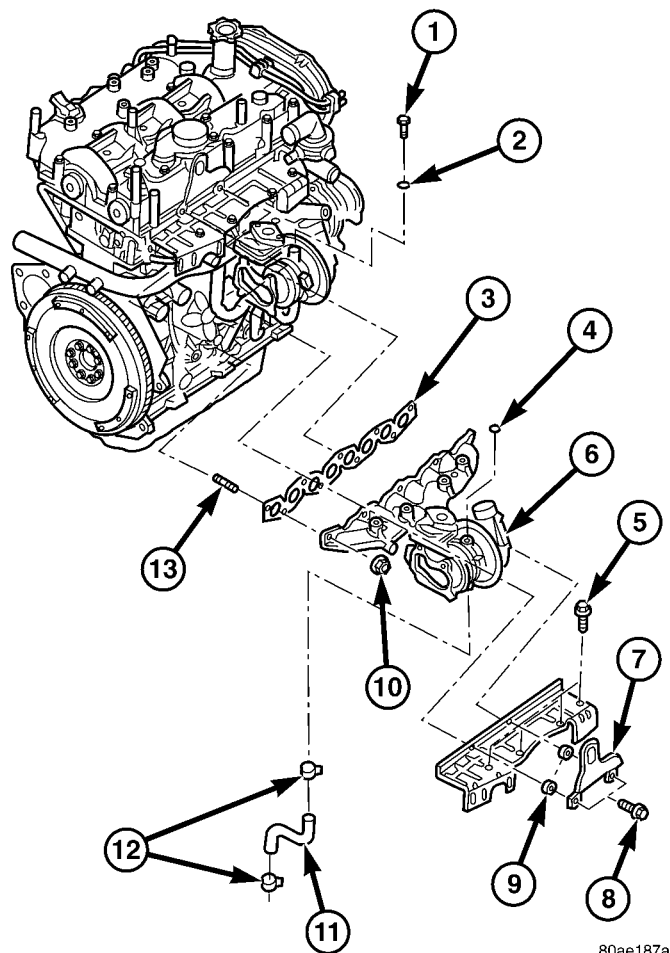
EXHAUST MANIFOLD AND TURBOCHARGER
